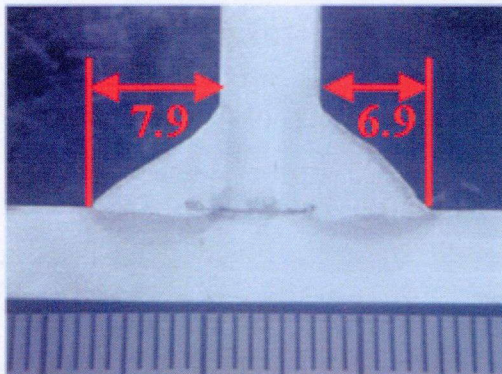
Cross section in the weld zone of the fillet welded joint showing fillet size.
